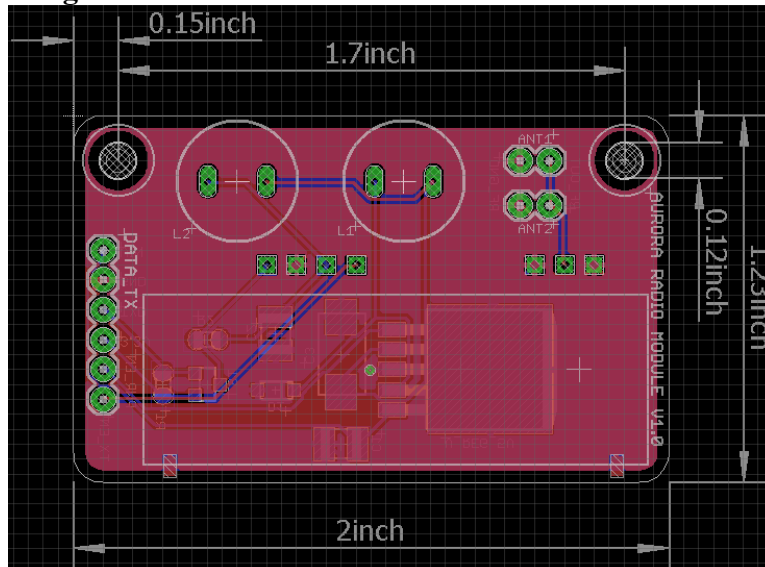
EAGLE Board View of Radio Module with PCB Dimensions
